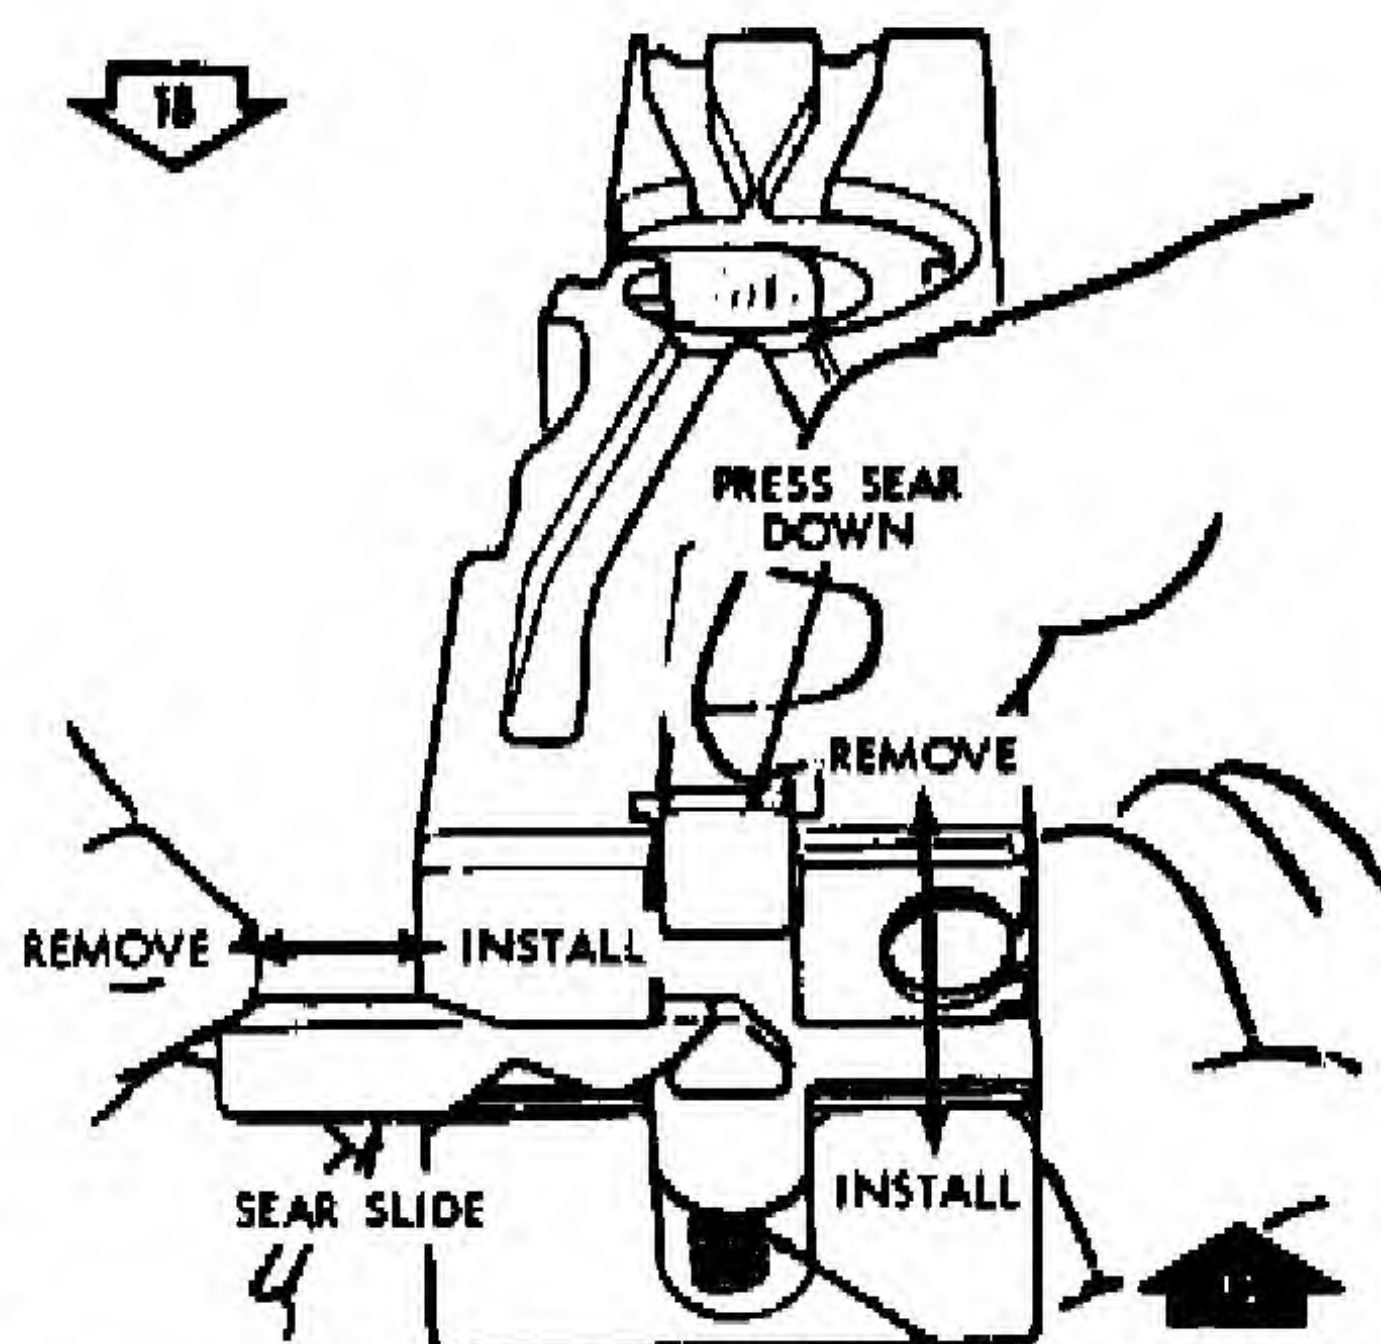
Disassembly/assembly of Caliber .50 Machine Gun, M2. (10 of 20)
